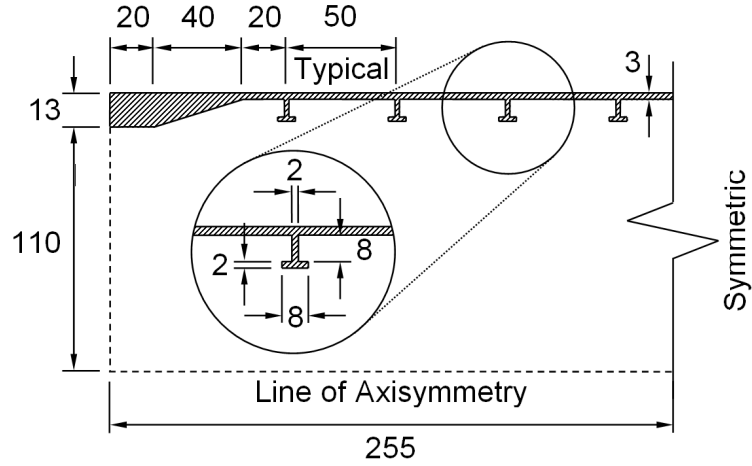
Design dimensions of the test specimen, figure is adapted from [50]
